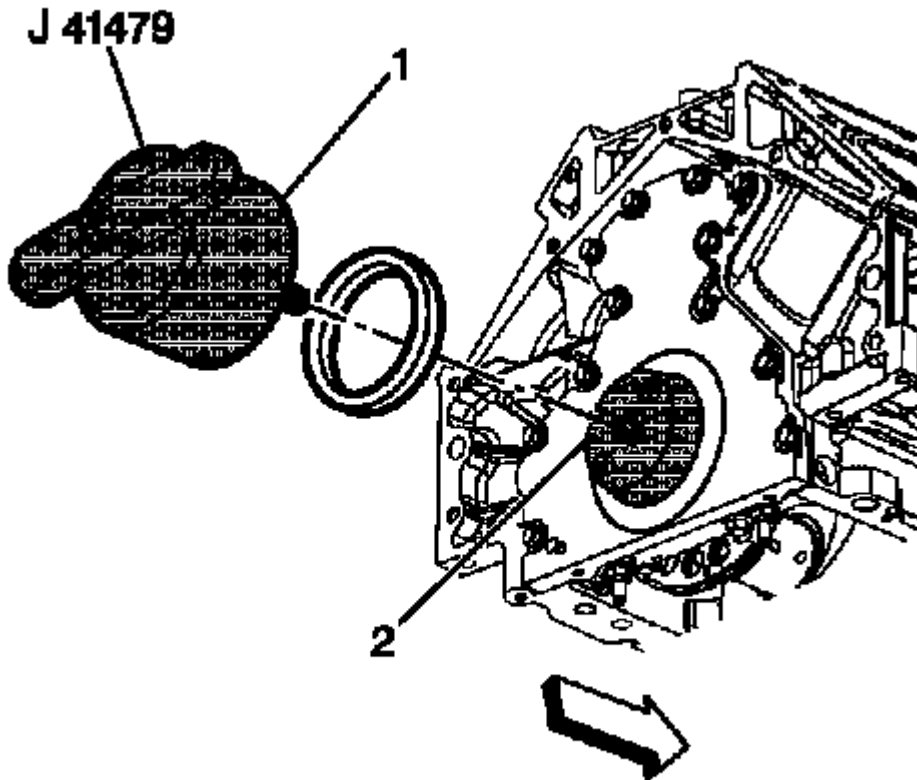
Installing Crankshaft Rear Oil Seal Using J 41479
